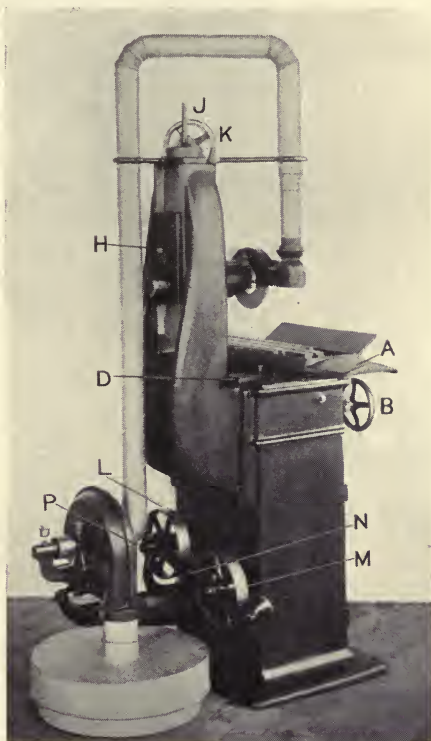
BROWN & SHARPE NO. 2 SURFACE GRINDER
